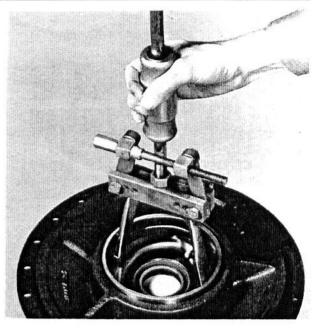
Carrier Bearing Cup Removal (Diff. Lock)
